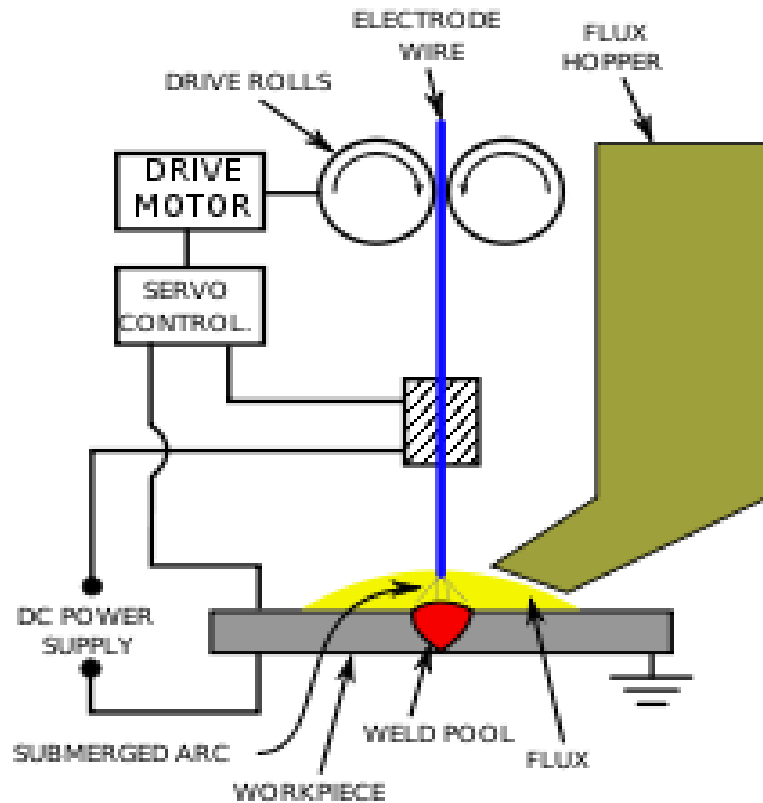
Submerged Arc Welding, process 121(Submerged Arc Welding)
